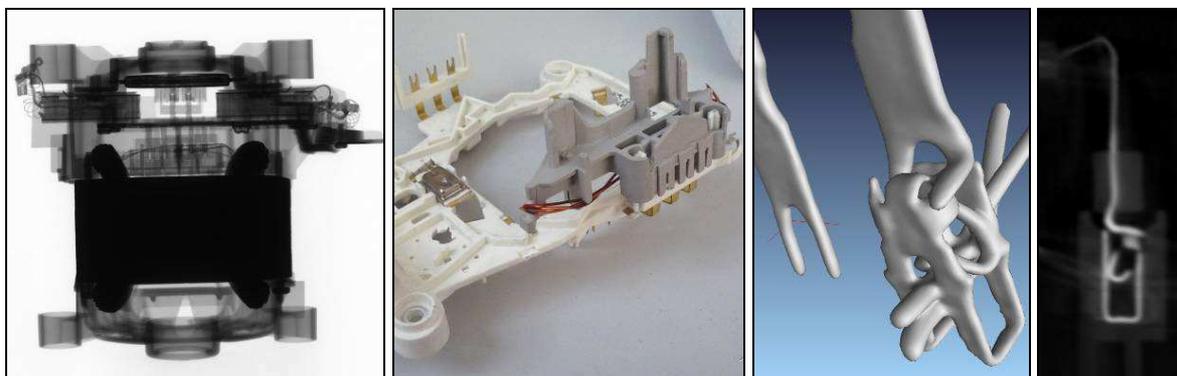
Engine from washing machine a) x-ray picture b) demounted parts of interests
